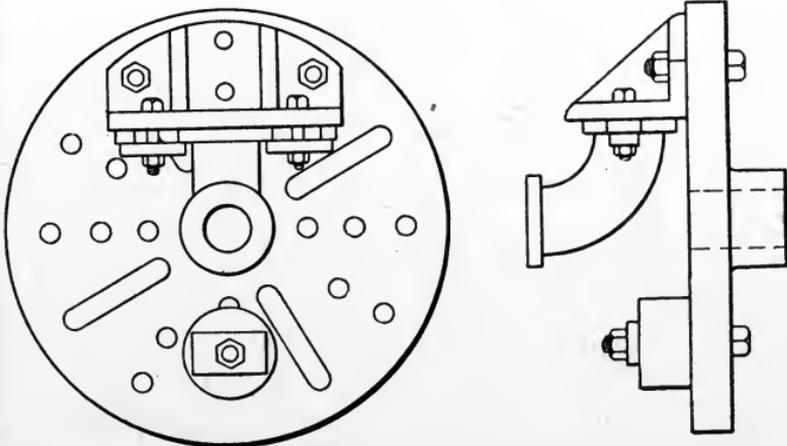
Angle Iron Clamped to Faceplate and Counterbalanced
